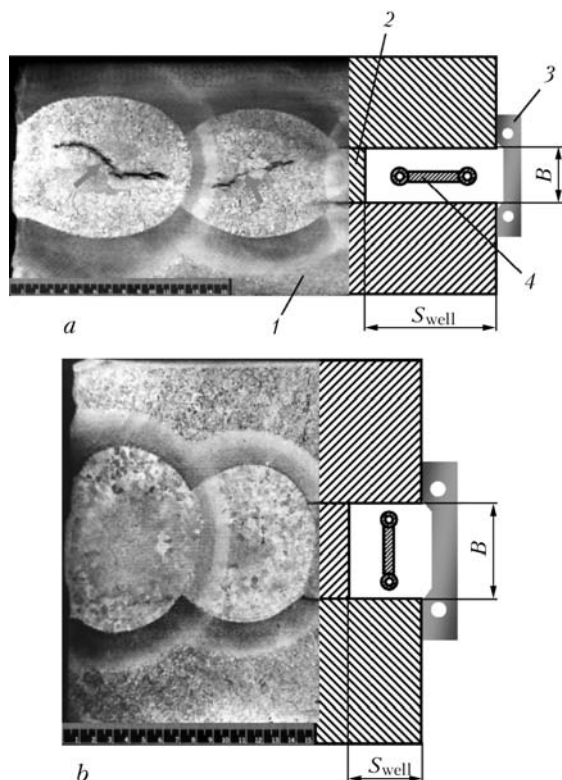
Transverse macrosections of multi-layer electroslag welds performed with longitudinal (*a*) and transverse (*b*) arrangement of consumable nozzles in a gap: 1 – billets being welded; 2 – forming plate-spacer; 3 – forming water-cooled device; 4 – consumable nozzle
